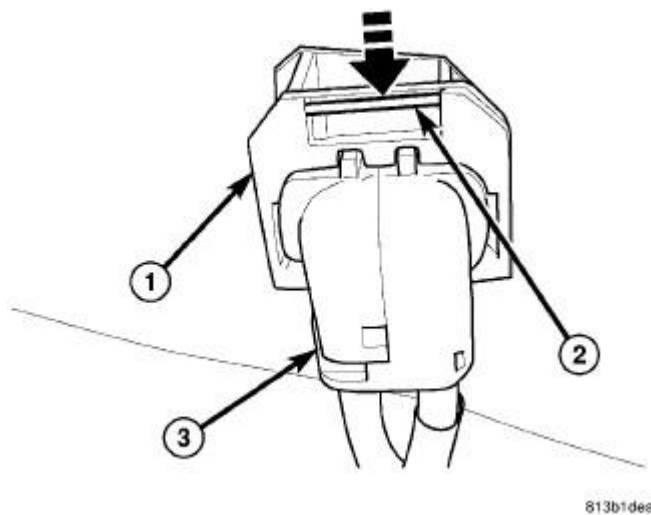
RELEASE WHEEL SPEED SENSOR CONNECTOR
